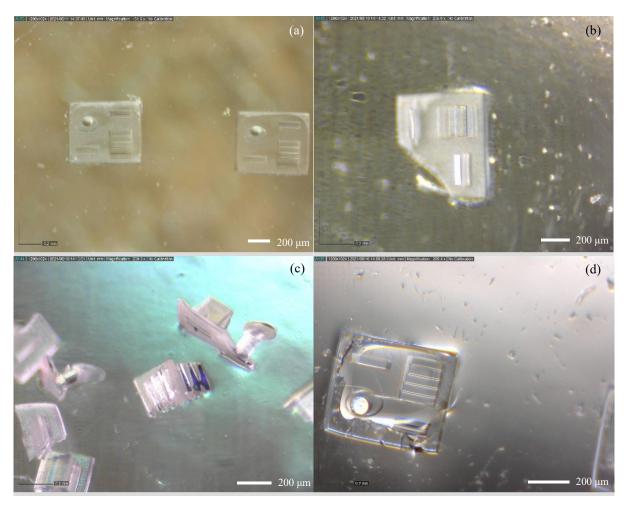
a) Negative PDMS mold with no treatment and trapped master mold b) Master mold separated with tape and c) Master mold separated with tweezer. d) Negative PDMS mold damaged by tweezer
